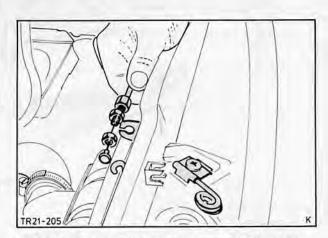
Attach hood cable (only necessary with 'B' engine)
